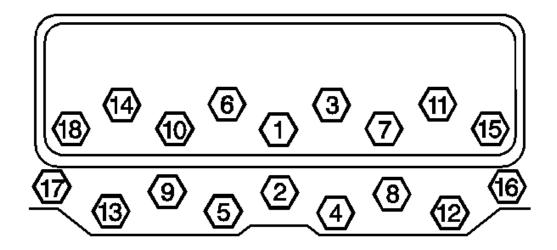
Cylinder Head Bolt Tightening Sequence Courtesy of GENERAL MOTORS CORP.
